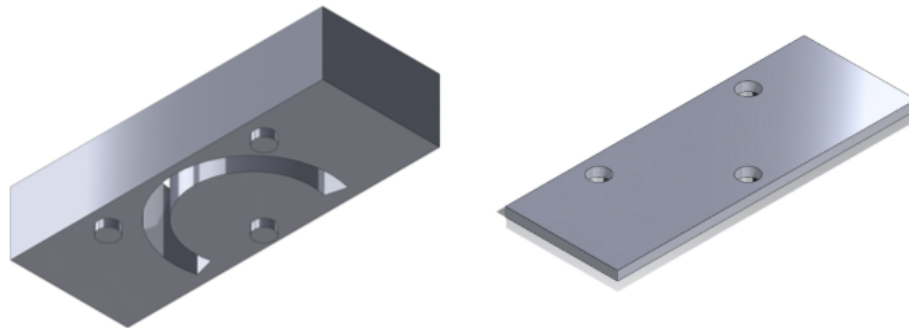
Isometric view of the first version of the mold used to cure bioplastic. The mold consists of two parts: a hollow C-shaped body (left) and a flat bottom panel (right). Both are made with an Ultimaker 3D printer and then assembled and taped to ensure water-tightness. Bioplastic solution is then poured into the vacant space on the top mold.
